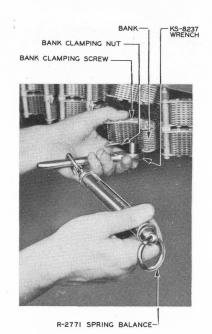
Method of Checking Tightness of Bank Clamping Nut
